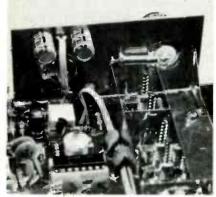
QUARTER-WAVE HARDLINE BALUN is soldered to board only at its ends.
